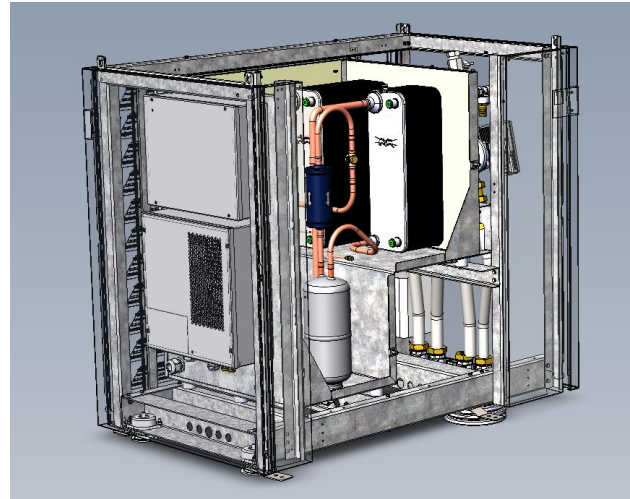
CAD-Drawing, front-side - main assembly of R290 35kW BW-HP showing control cabinet and heat exchangers.
